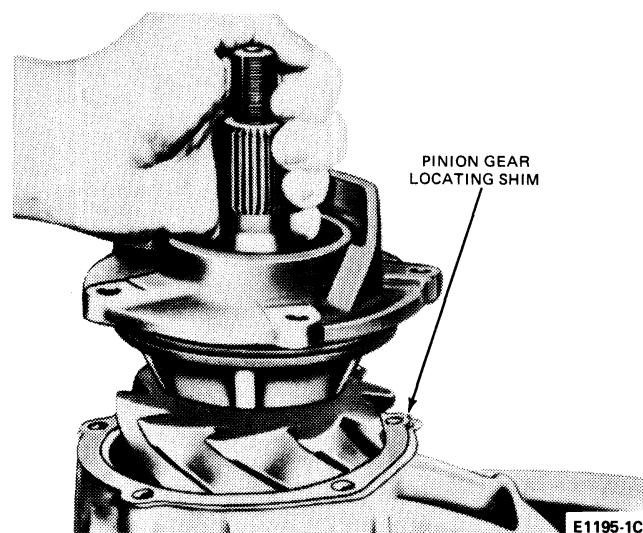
Removing or Installing Pinion and Retainer Assembly
